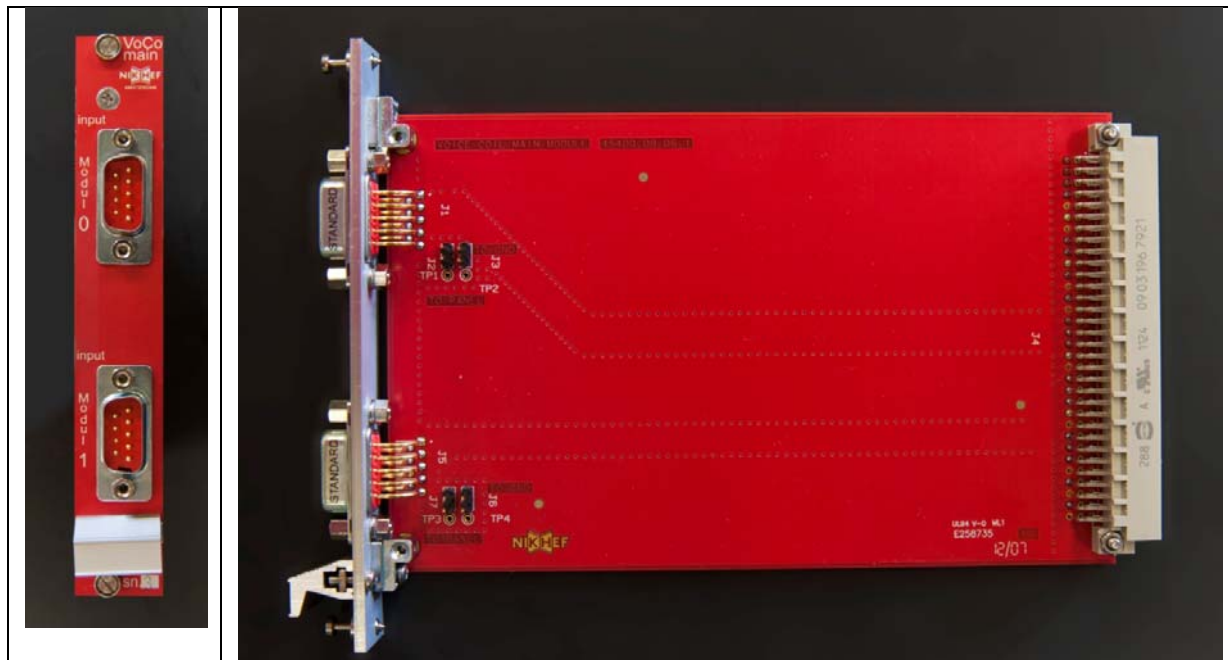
Photo of the VoCo main module, Front and PCB shown.
